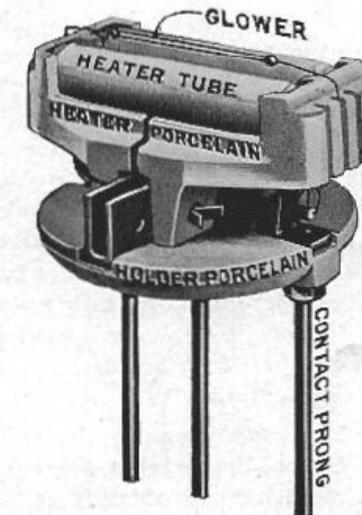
NAMES OF PARTS OF THE NERNST LAMP HOLDER
